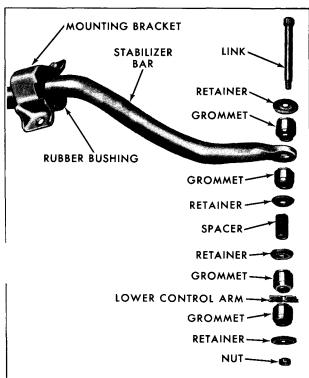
Front Stabilizer Linkage (Eldorado)
